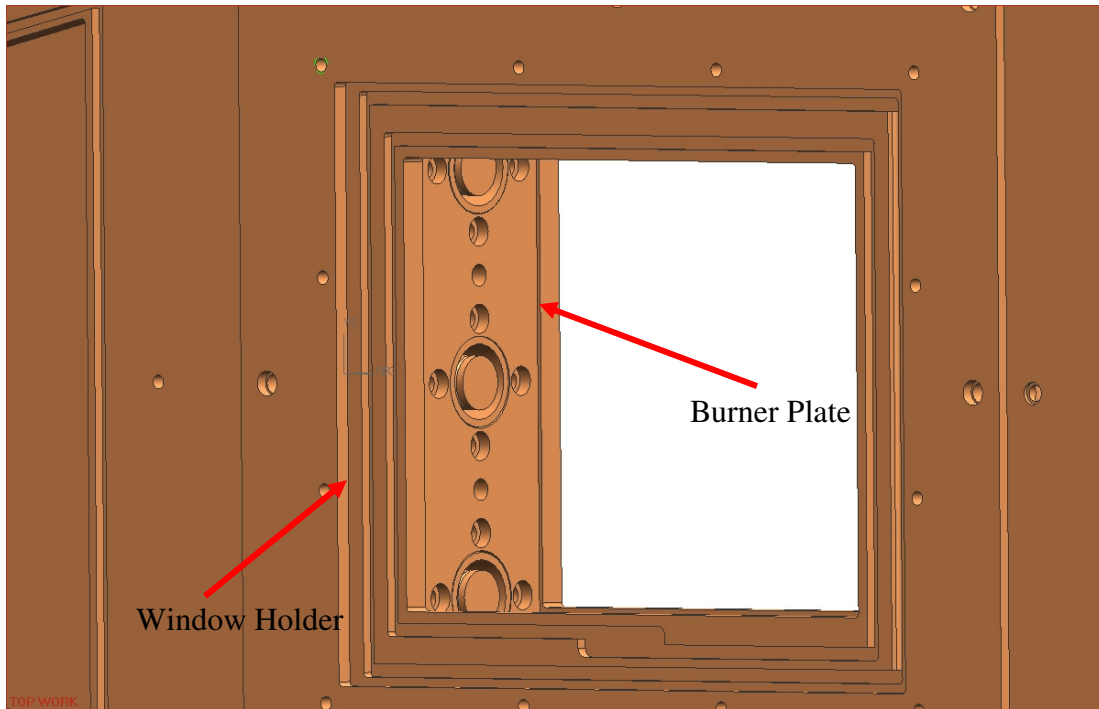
Assembly View of Test Combustor Body, Burner Plate, and Window Holders
